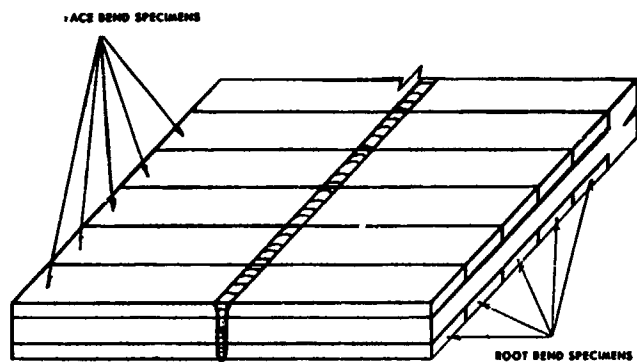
Specimen layout from one inch electron beam weldment
